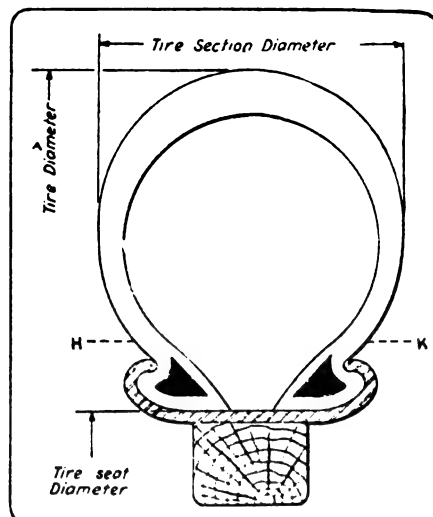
Soft-Bead Clincher Tire Mounted on One Piece Rim.
